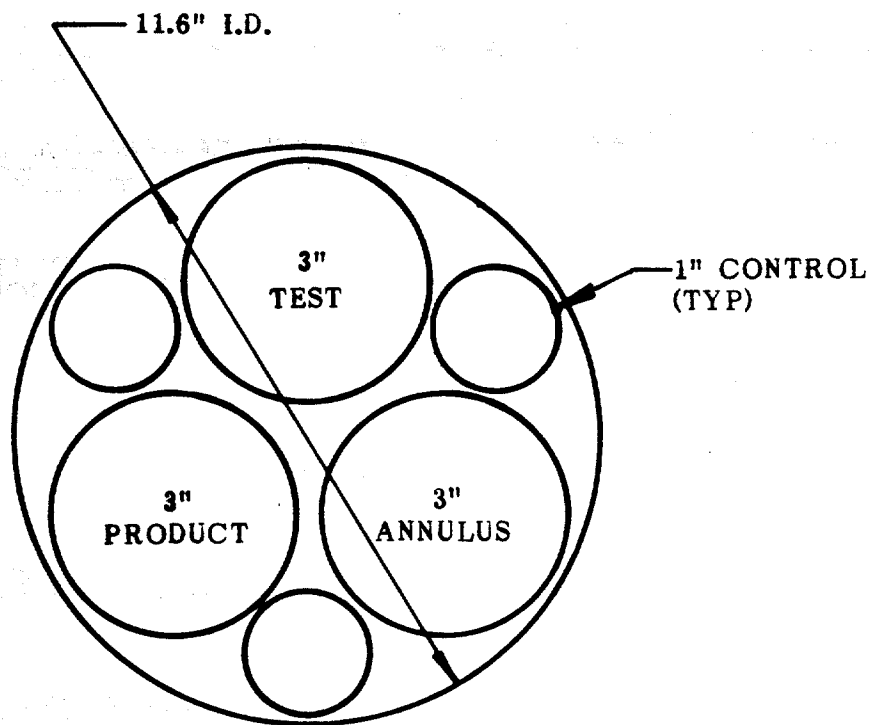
FLEXIBLE RISER SYSTEM
